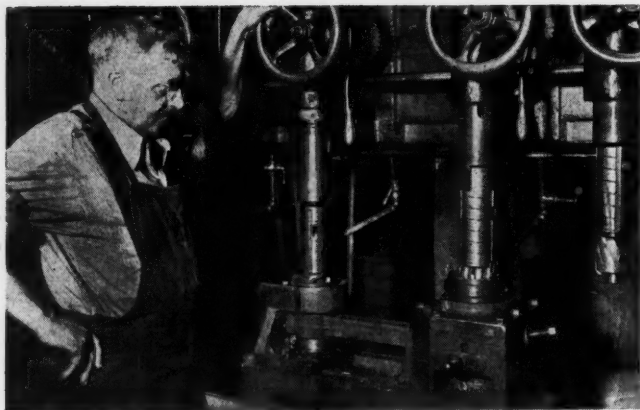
A Footburt drill, equipped with special spiral reamers, is used to bore the wristpin and main bearing holes in the connecting rod for a large Diesel engine.
